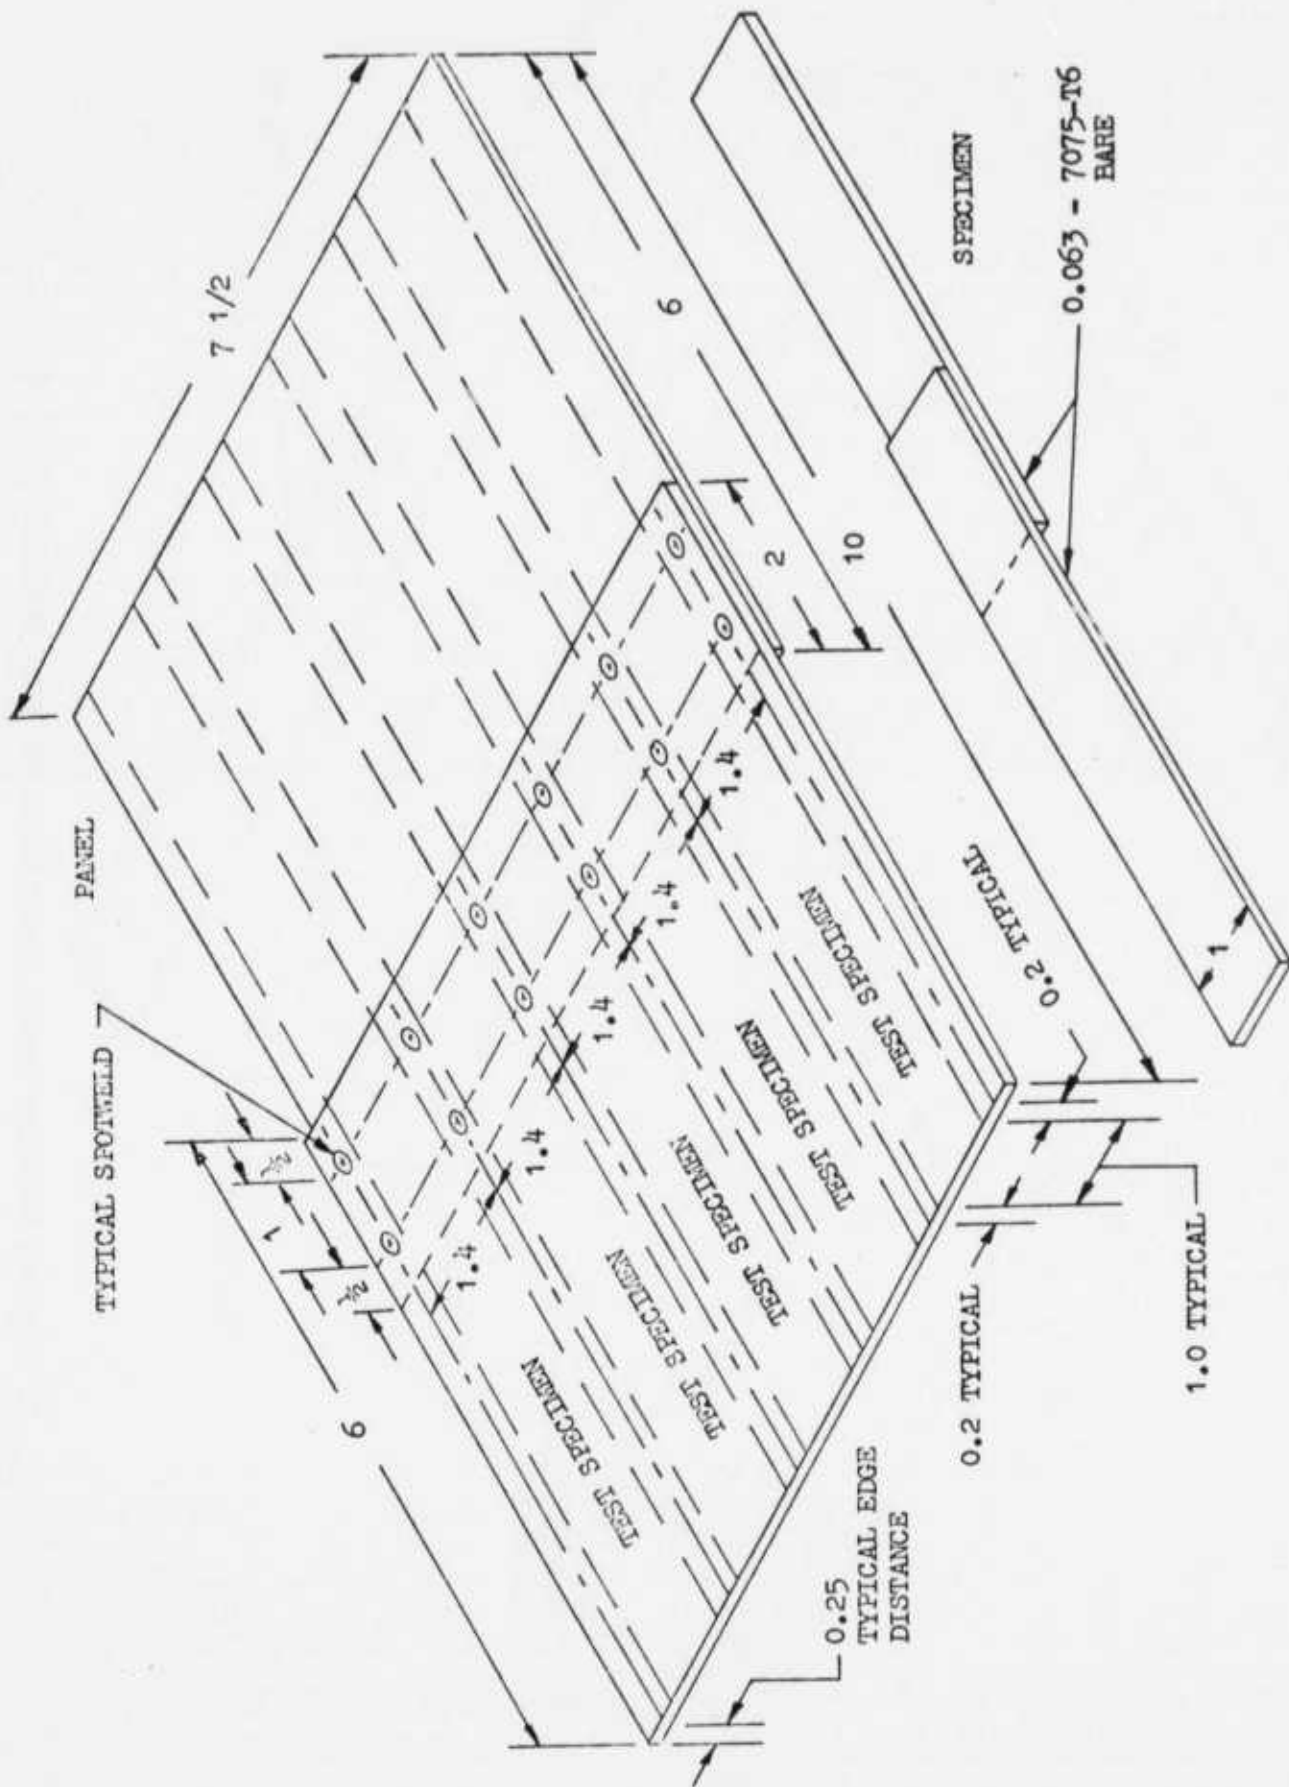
LAP SHEAR TEST PANEL AND TEST SPECIMEN (L/t = 32)
